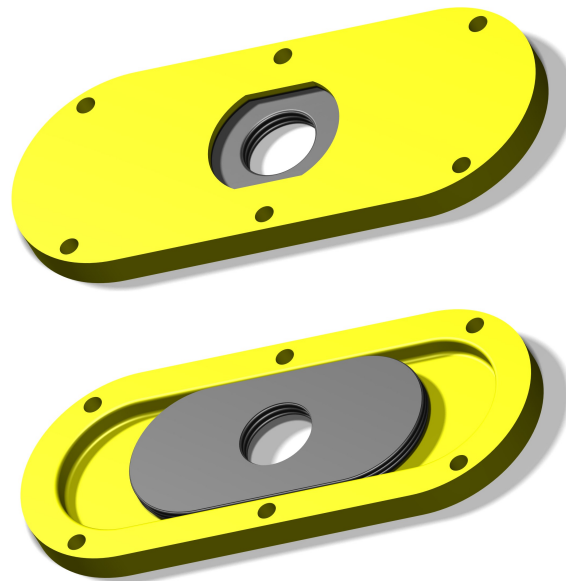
The first design iteration of the shaft seal is a two-part design including a rigid housing and a flexible sliding gasket.
